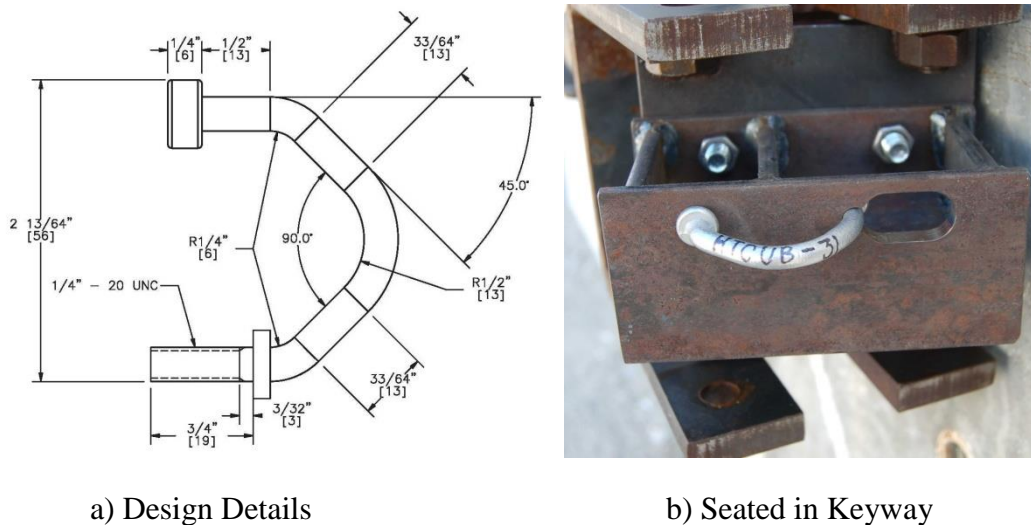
Keyway Bolt—(a) Design Details and (b) Seated in Keyway
